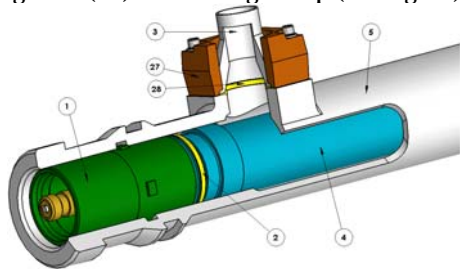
Schematic representation of the feeder coupling mounting at the end fitting
